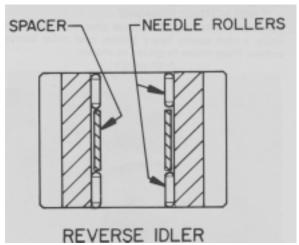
Coat inside diameter of reverse idler gear with a high quality heavy grease. This will hold needle rollers in position while assembling. (See illustration for position of rollers and spacer).
